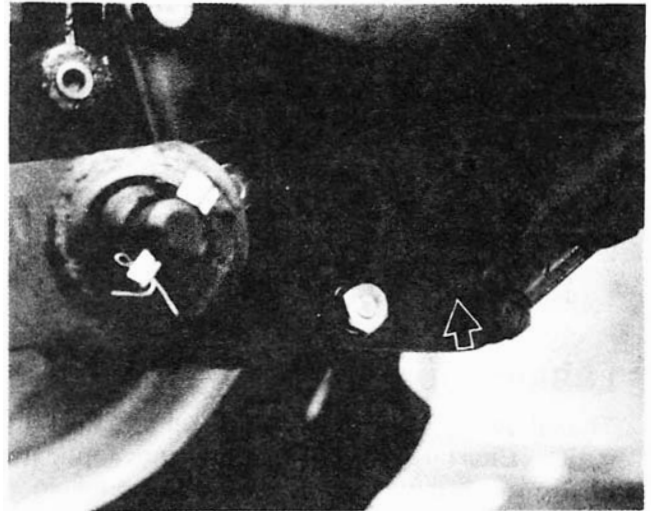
Transmission, Rear Axle Center Housing and Rear Axle Oil Drain Plugs
